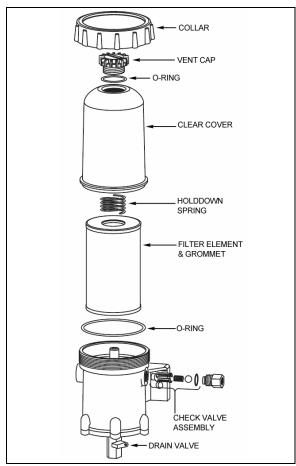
DAVCO FUEL PRO 382 EXPLODED VIEW03034
